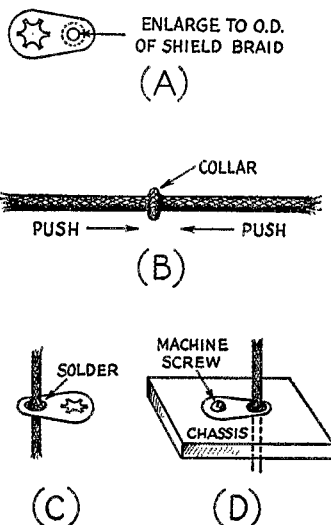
Illustration of the W0QYJ method of grounding shielded wire at through-chassis points.
